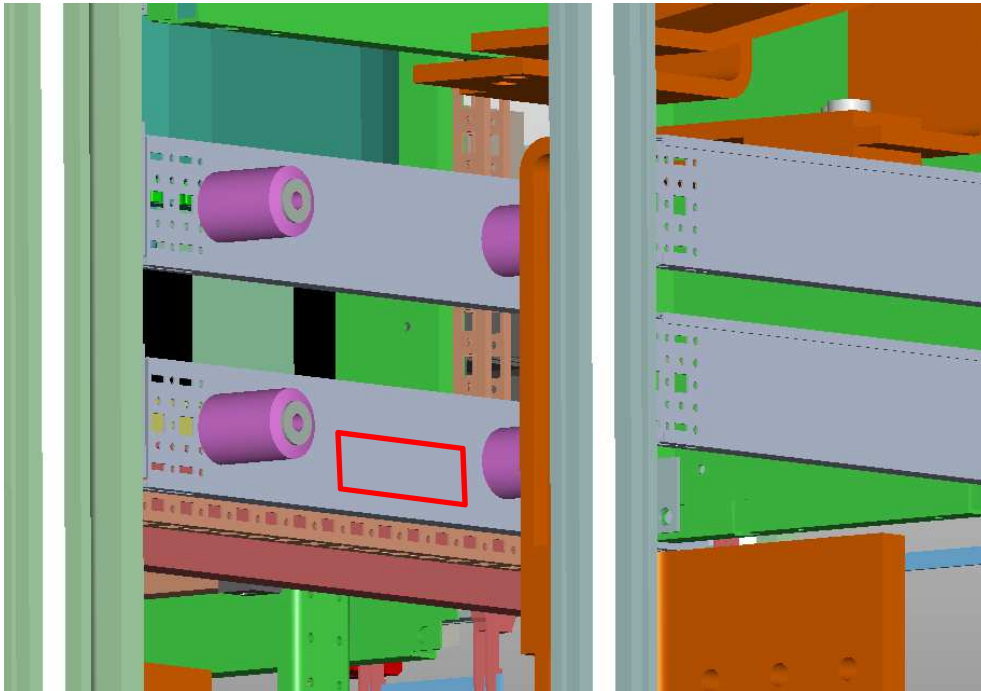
Assemble the 100mm DIN rail including the snapped capacitor module D004-A6 on the lower chassis.
